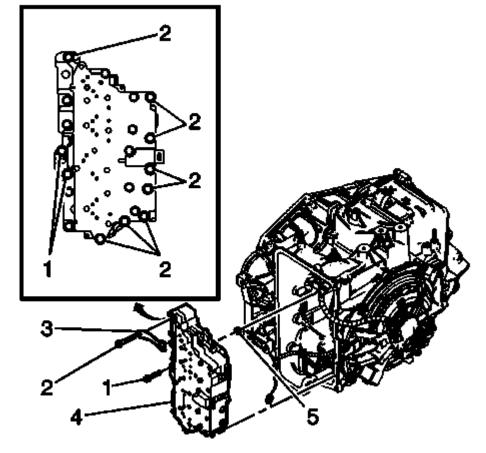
Identifying Control Valve Body Bolts Courtesy of GENERAL MOTORS COMPANY
